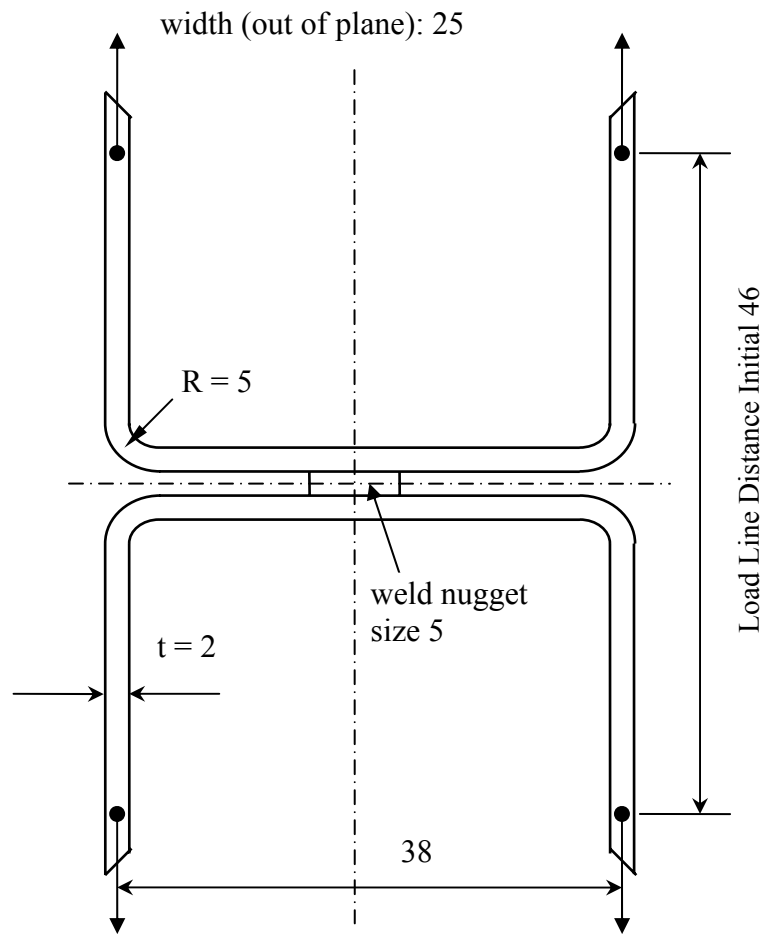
Coach-peel spot-weld geometry.
